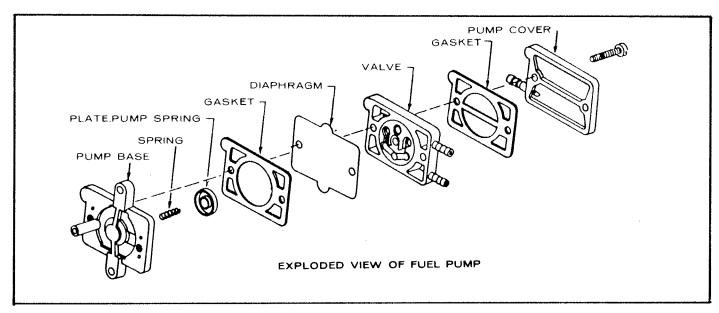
A. EXPLODED VIEW OF FUEL PUMP
